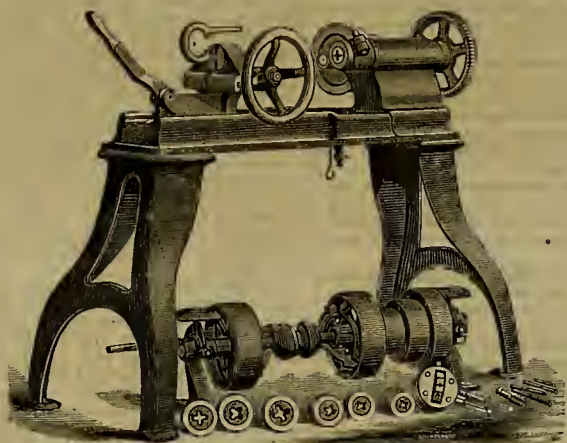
BOLT CUTTER AND NUT TAPPER.
